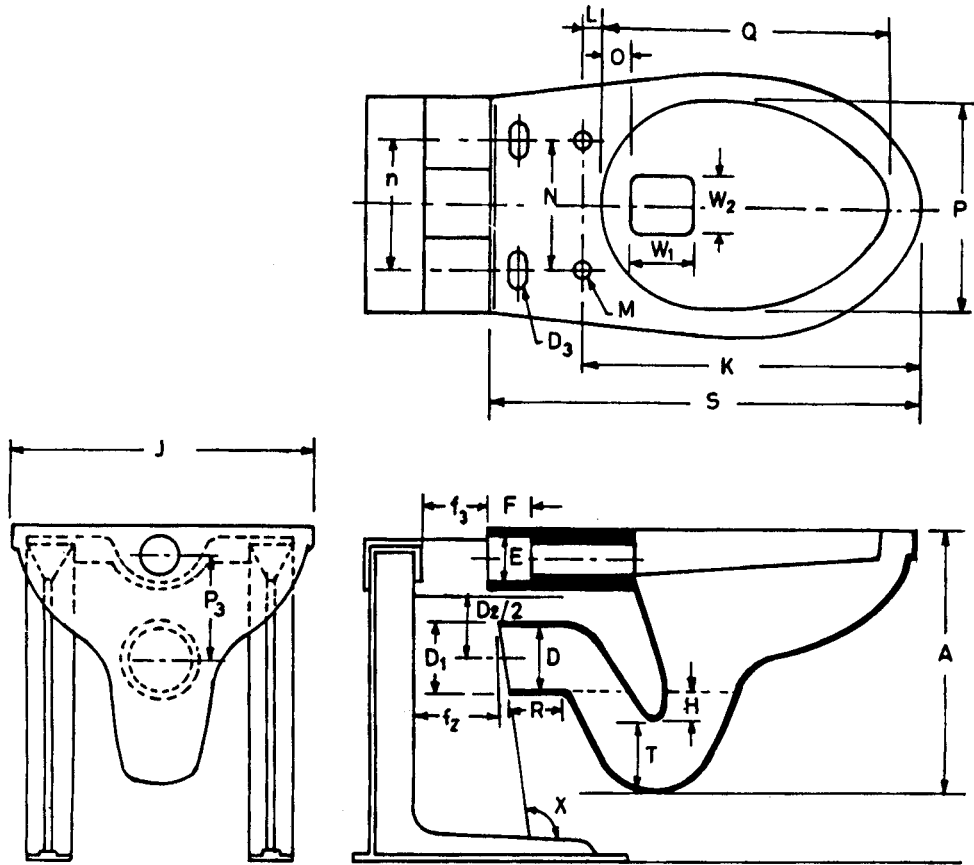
TYPICAL ILLUSTRATION OF WATER CLOSET WITH FIXING ARRANGEMENT ON TOP OF BRACKET (PATTERN 2)
